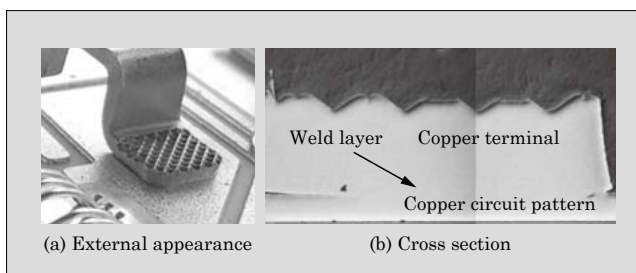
External appearance and cross-sectional view of ultrasonically welded terminal
